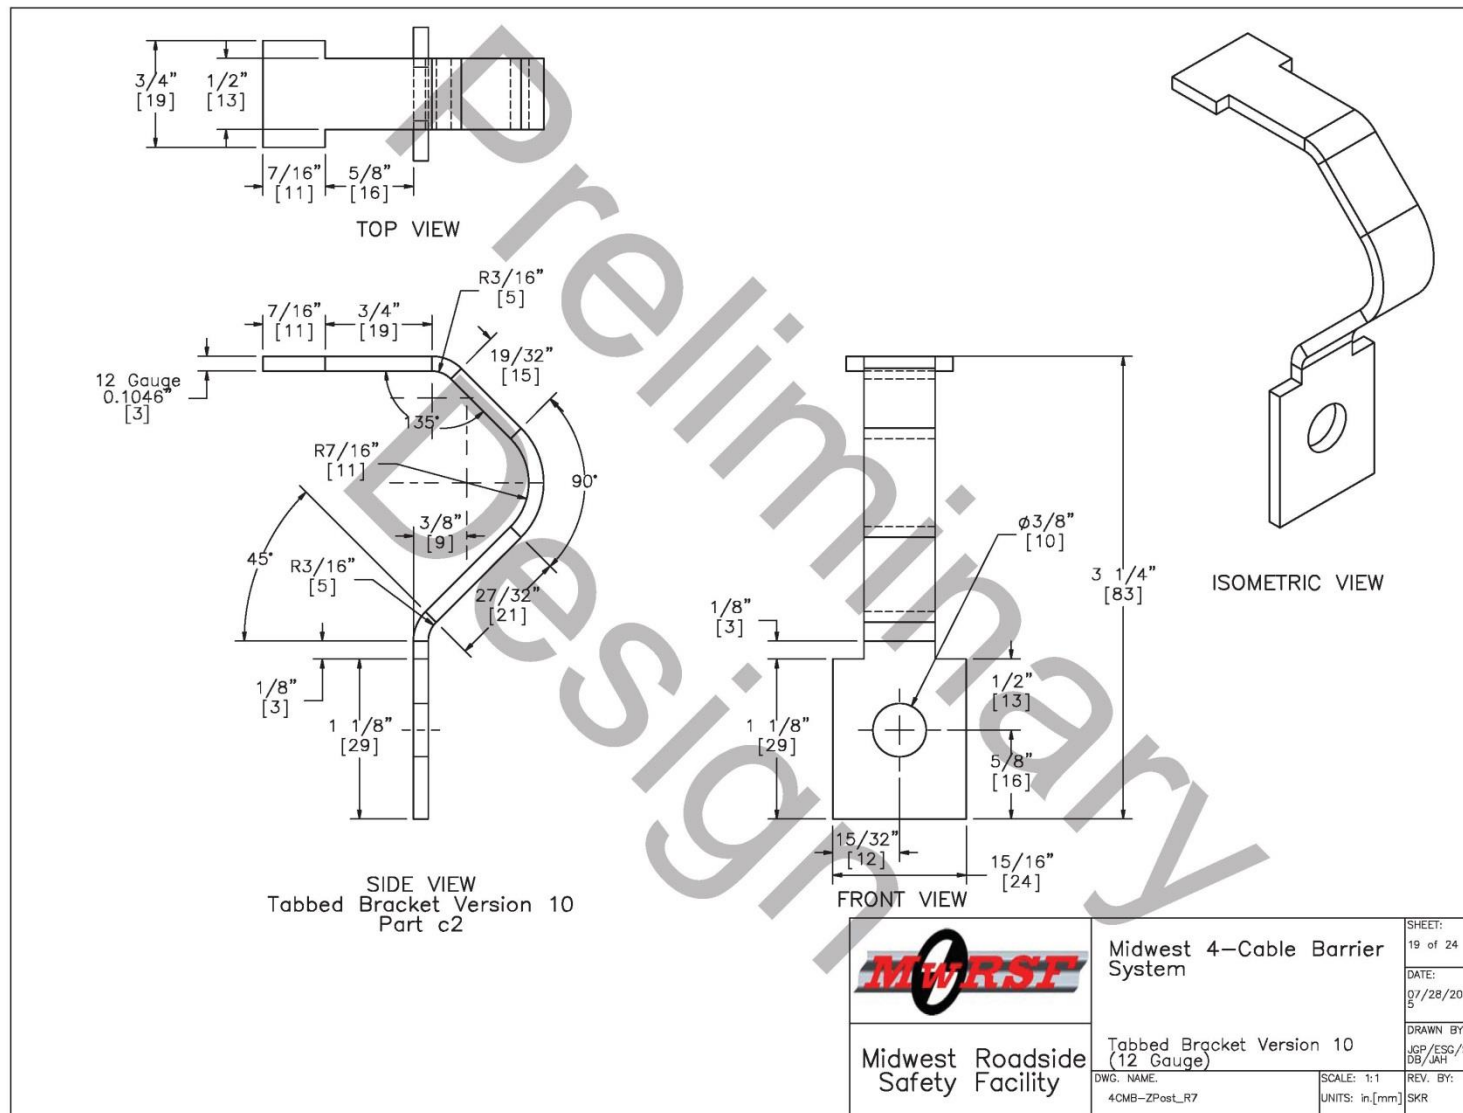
Tabbed Bracket Details, 12-Gauge, Test No. MWP-1
